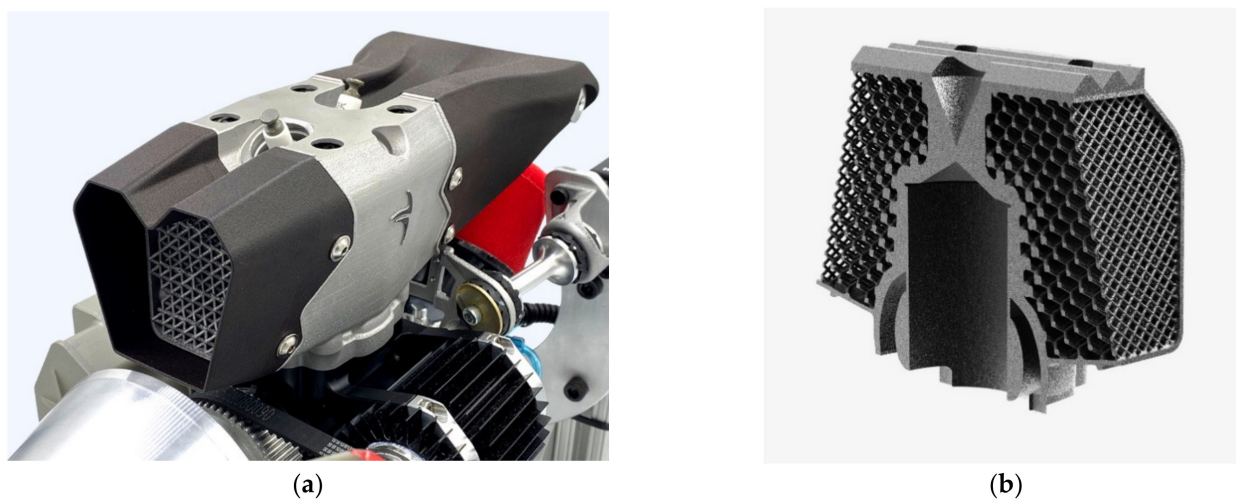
Microturbine generator housing (a); cross-section of the cooling system of the combustion engine cylinder (b) [38] (image courtesy of nTopology).
